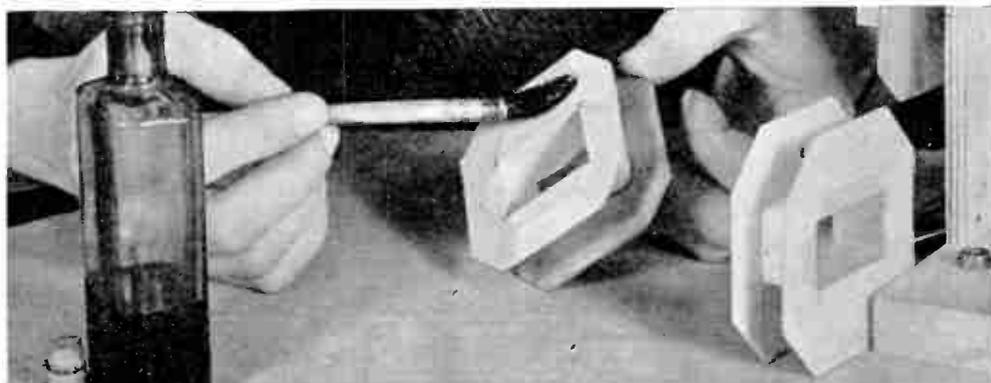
SHELLACKING THE BOBBINS BEFORE WINDING THE COILS.
